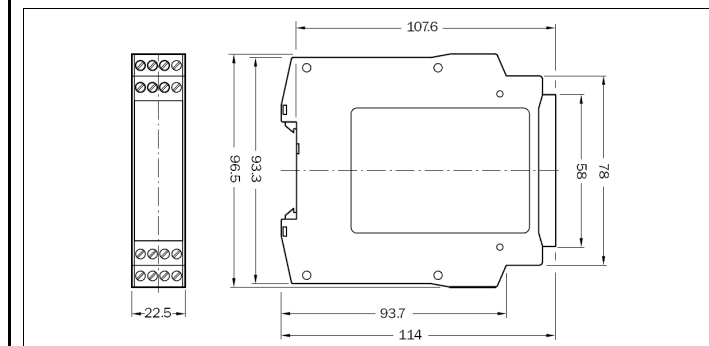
Dimensional drawing UE42-2HD with removable terminals (mm)
